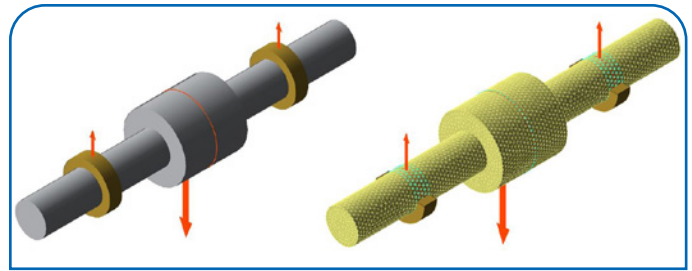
Example model of a gearbox shaft with dual bearing supports.
